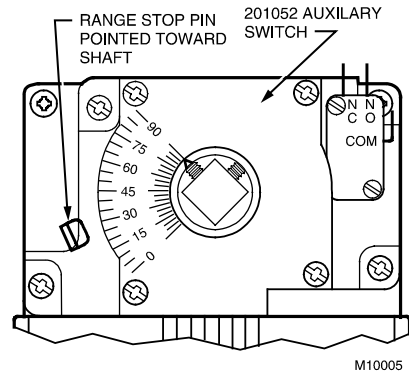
201052 Auxiliary Switch mounted on W7751H.
